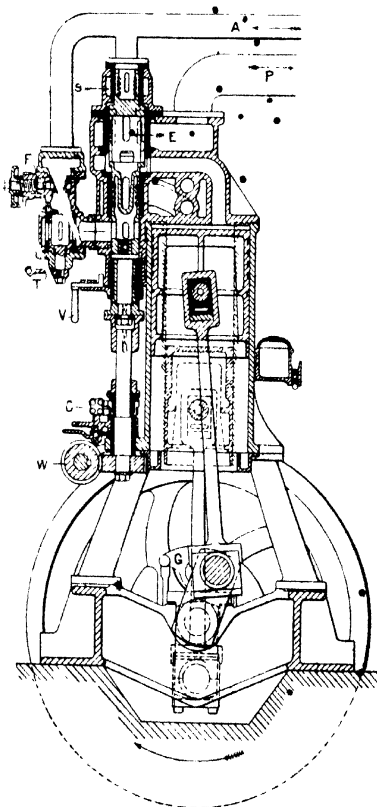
A. — Cross-section of three-cylinder compound Clarke-Chapman gas engine fitted with a rotary balanced action valve.
